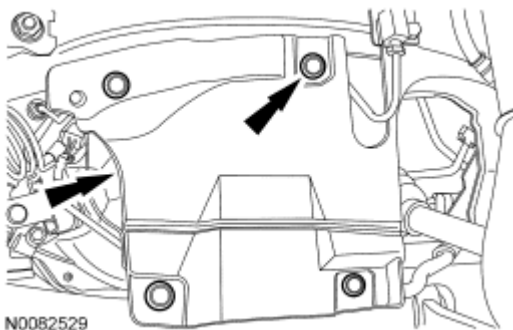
Locating Pin-Type Retainers & LH Splash Shield
